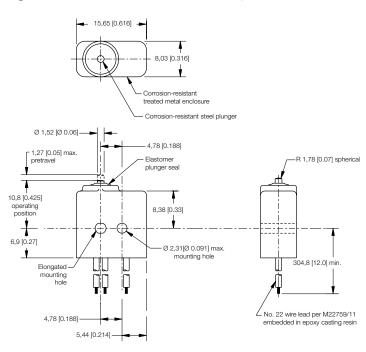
MICRO SWITCH™ XE Dimensions, Solder Terminal
